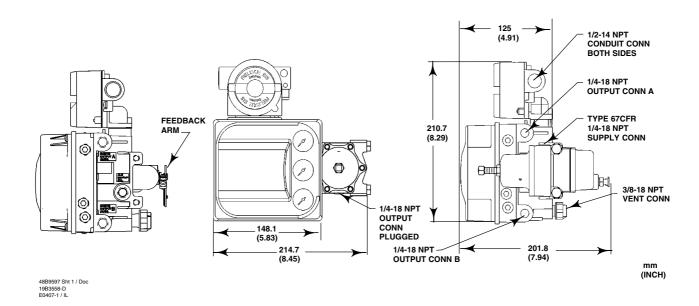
Dimensions for Type DVC6030 Digital Valve Controller with Integrally Mounted Filter Regulator
